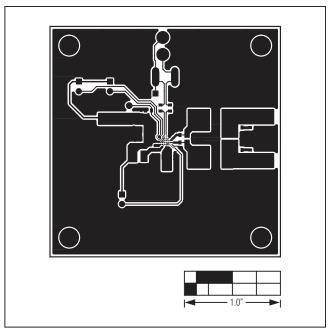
MAX98502 EV Kit PCB Layout—Component Side
